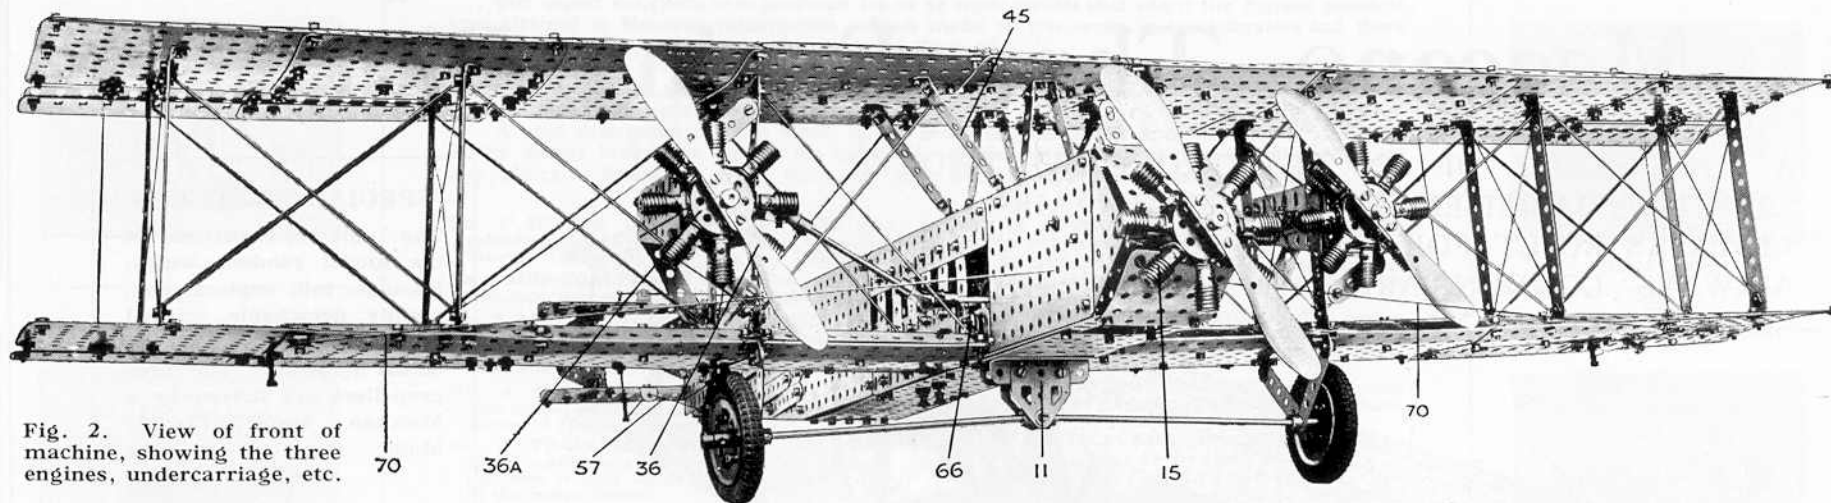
View of front of machine, showing the three engines, undercarriage, etc.
